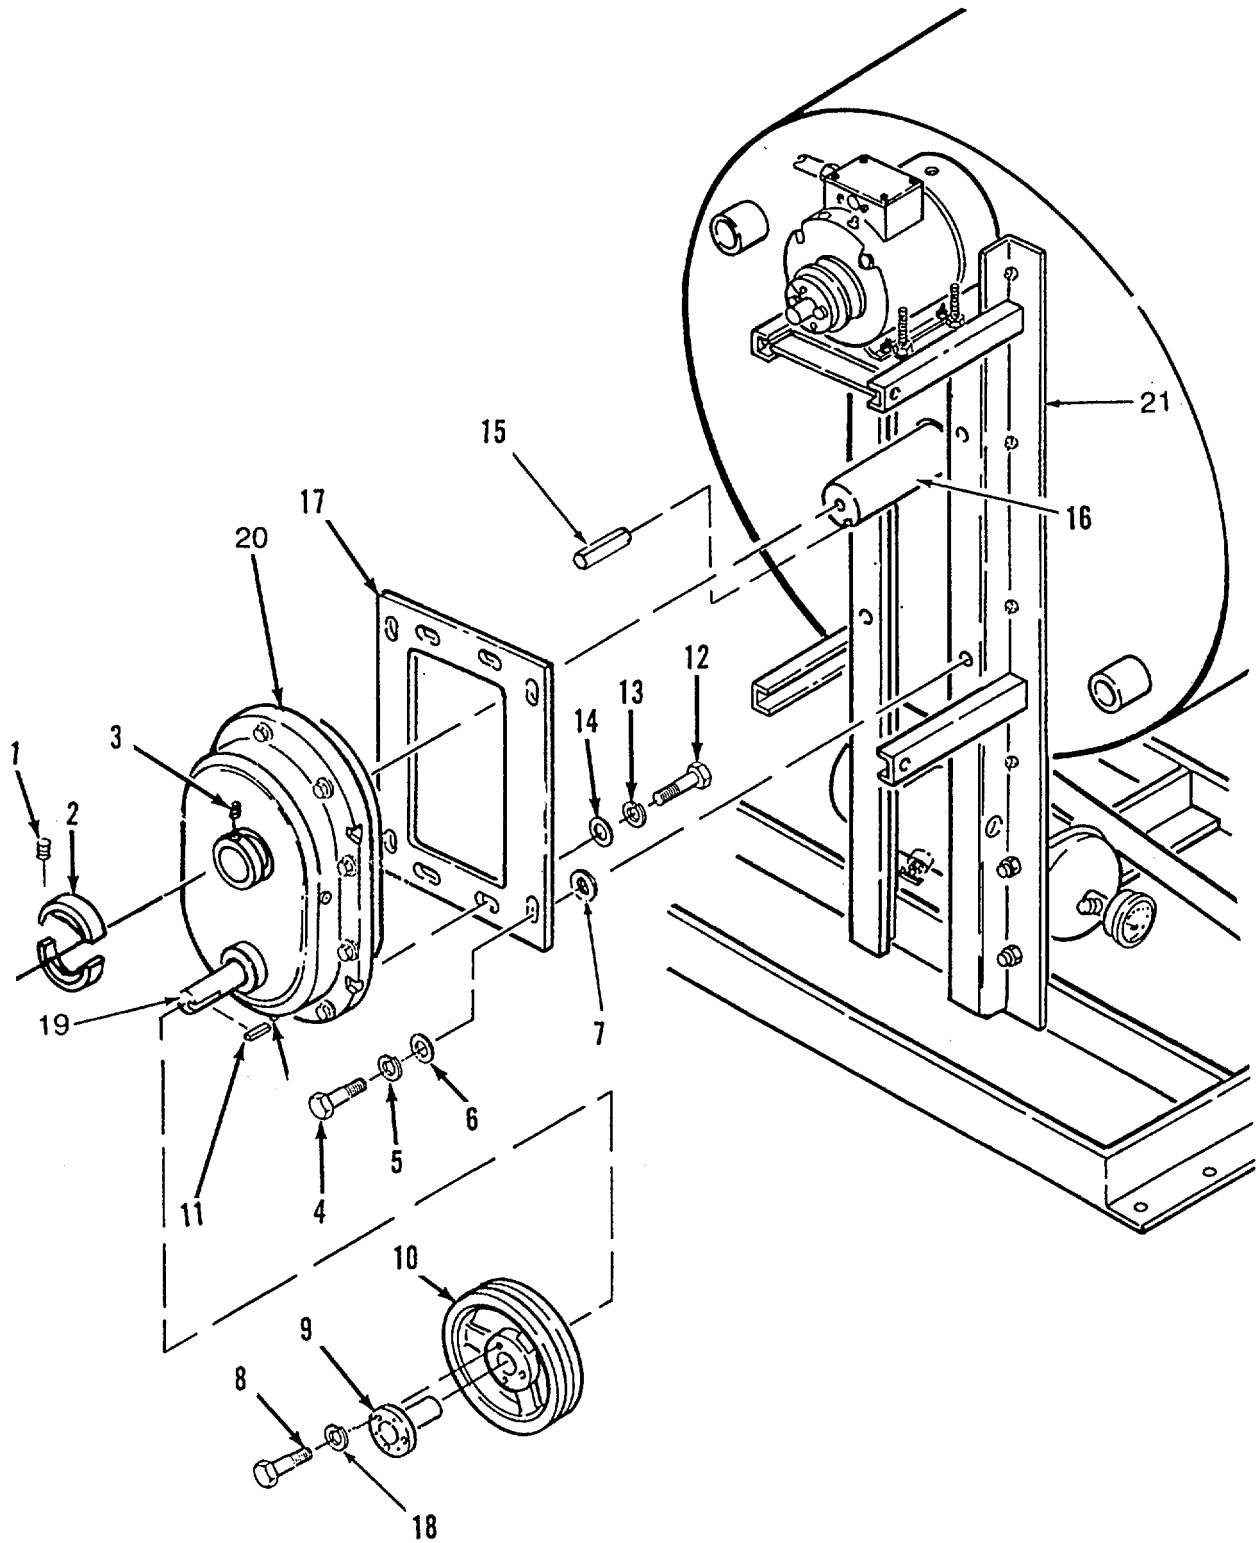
Reducer and Output Quill (Sheet 1 of 3)
